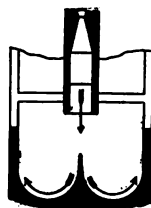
Double-bucket arrangement of Stumpf Steam Turbine.
